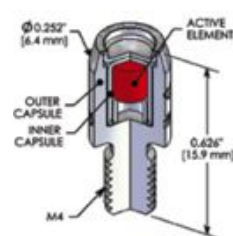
Technical drawing of the prototype showing a cut through the system. Labeled are the most relevant parts. Drawing provided by Donato Orlandi, LNGS.
